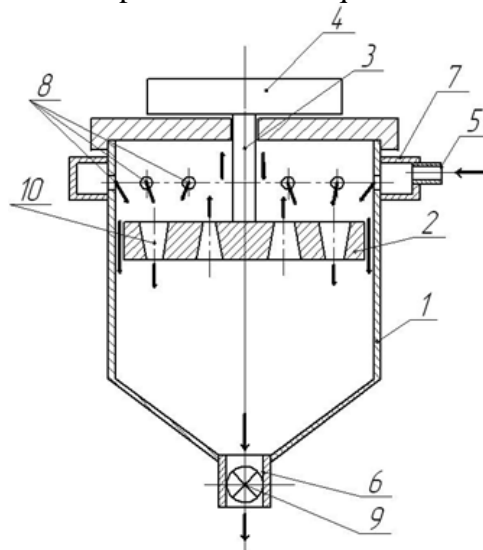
Scheme of a pulse homogenizer: 1 - lower cylinder cavity; 2 - piston - striker; 3 - rod; 4 - pulse drive; 5 - supply pipe; 6 - discharge pipe; 7 - inlet manifold; 8 - holes; 9 - valve; 10 - lower cylinder cavity
